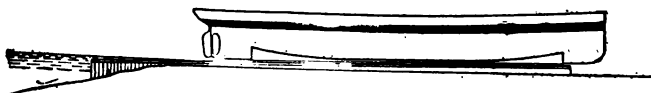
Ship in cradle. The thick black line indicates a "strake" of plating.
